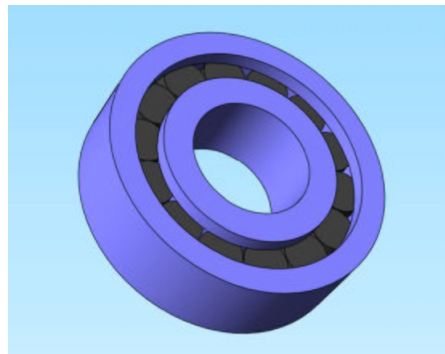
Solid Works model of a cylindrical roller ball bearing.
